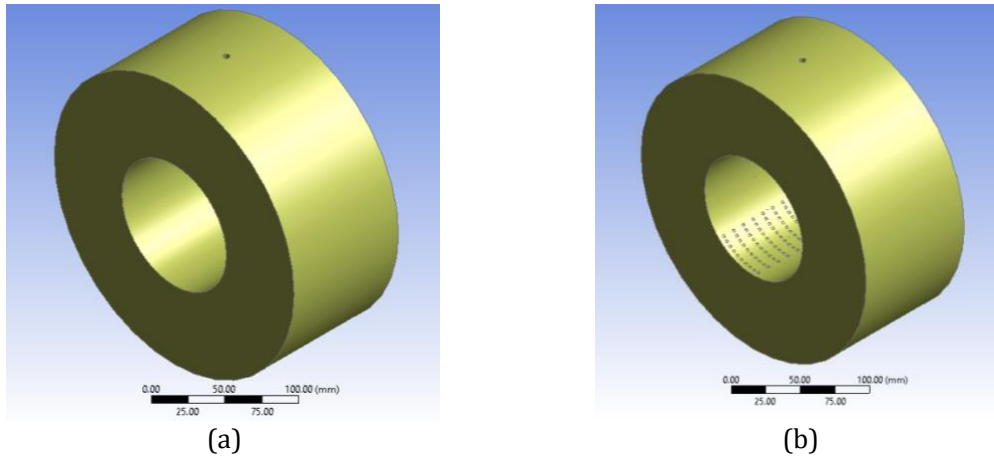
Bearing model of (a) plain bearing (b) square dimple textured bearing.
